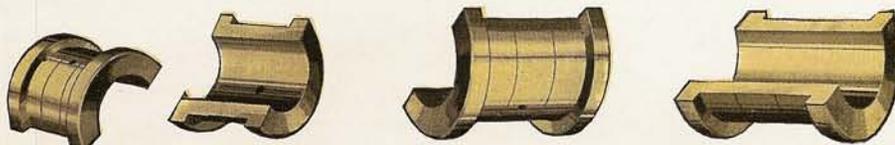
Hand Scraped Phosphor Bronze Bearings for Spindle
